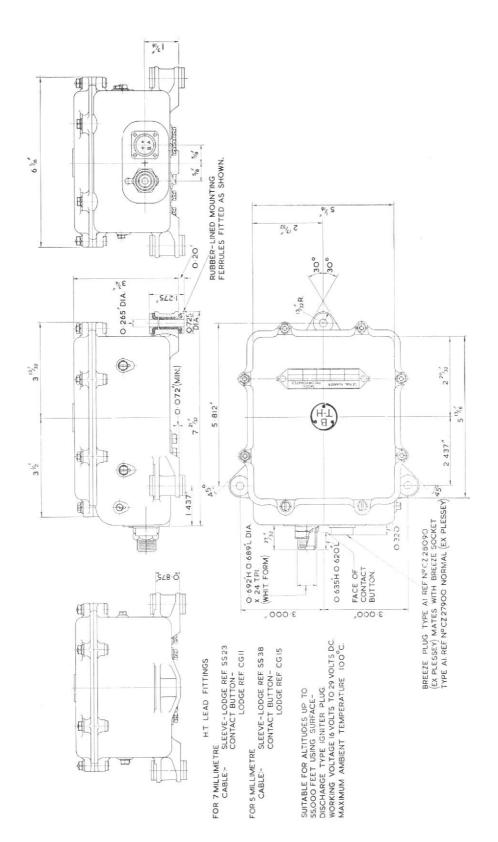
Approximate dimensions and connection details, type C10TS/1 unit.
